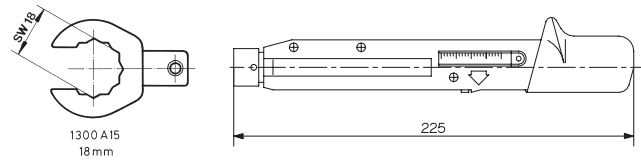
Torque wrench 4 ... 20 N·m Type 1300A39 and open ended insert tool Type 1300A15 (18 mm) or 1300A33 (16 mm)
